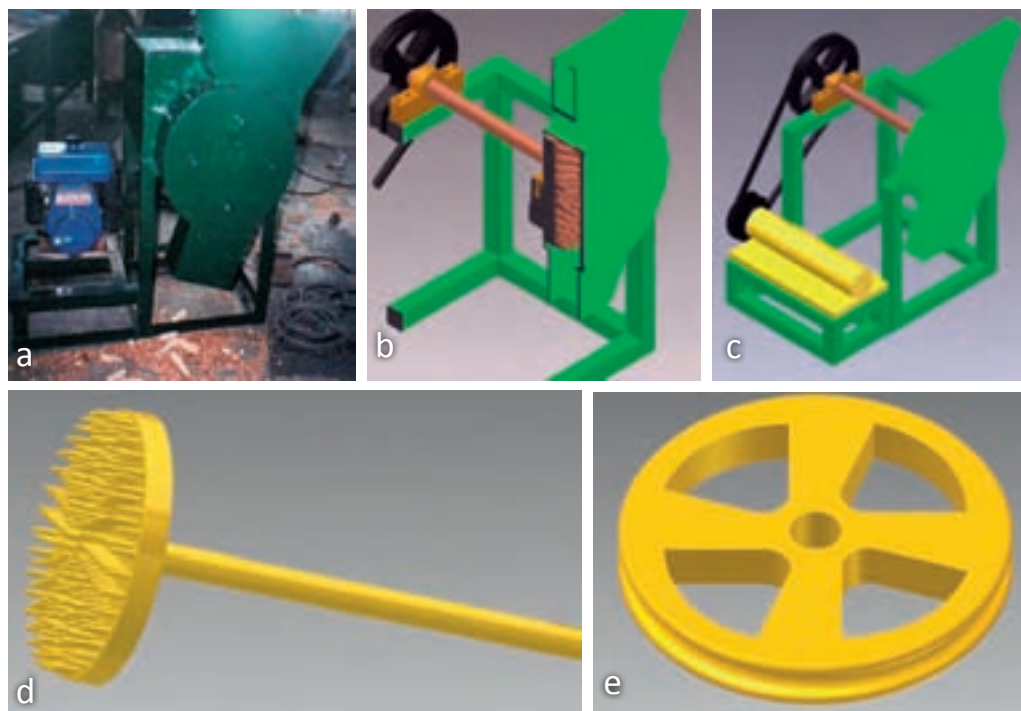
The maize thresher: (a) finished machine; (b) cross-sectional view; (c–e) orthographic views of (c) machine; (d) power shaft; (e) pulley
